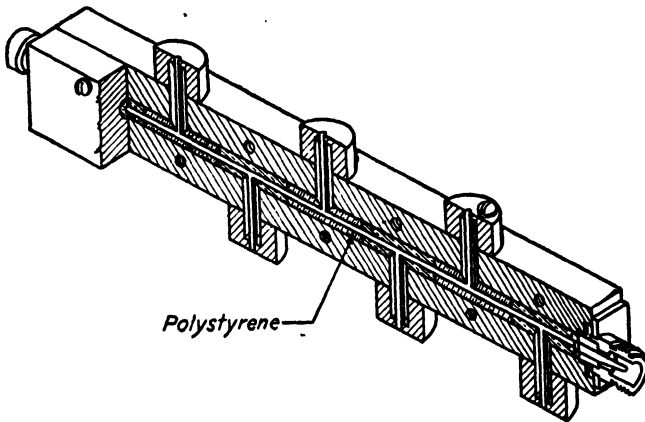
A split-block filter with split-dielectric fillers. This is a seven-section filter of type 3-2. The measured response of this filter is given in Fig. 27-15.
